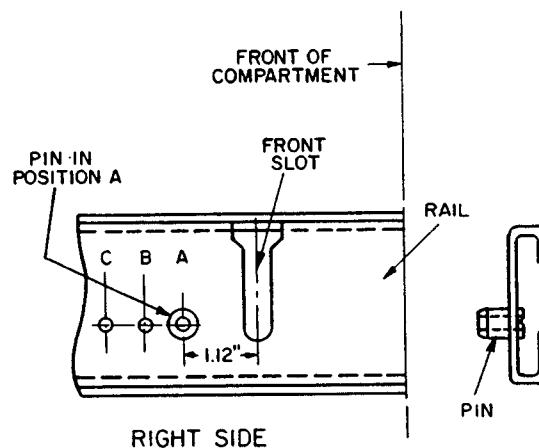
DRAWOUT BREAKER REJECTION SYSTEM
